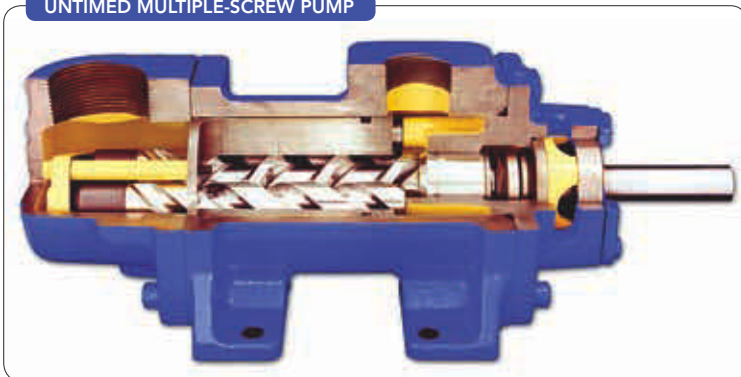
Unlike other pumps, this design can be fitted with a magnetic coupling.
